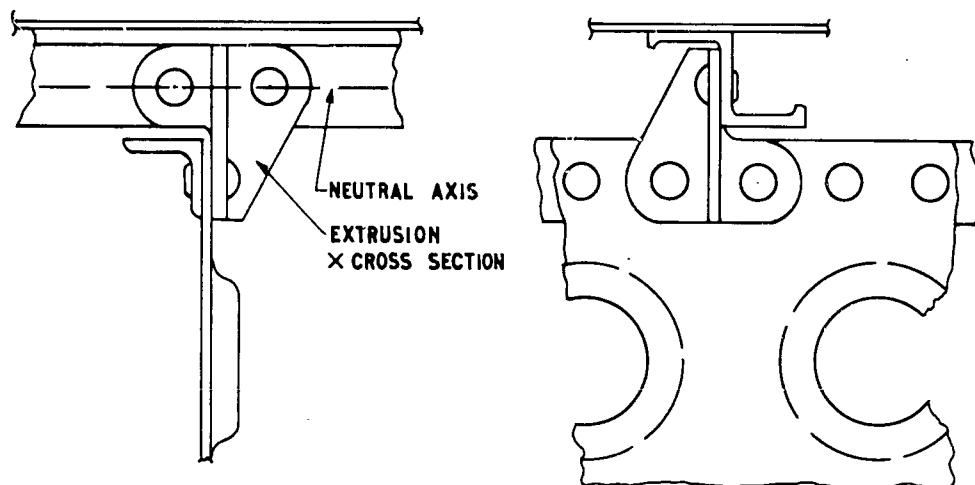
Detail DC-8 design of stringer to rib attachment (Ref.31)
